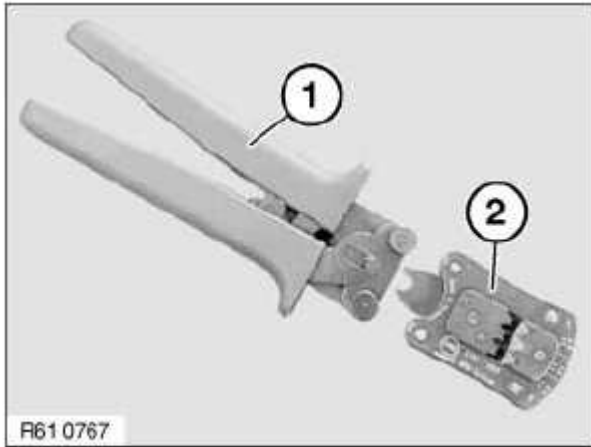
Identifying Crimping Head And Crimping Set Plier
